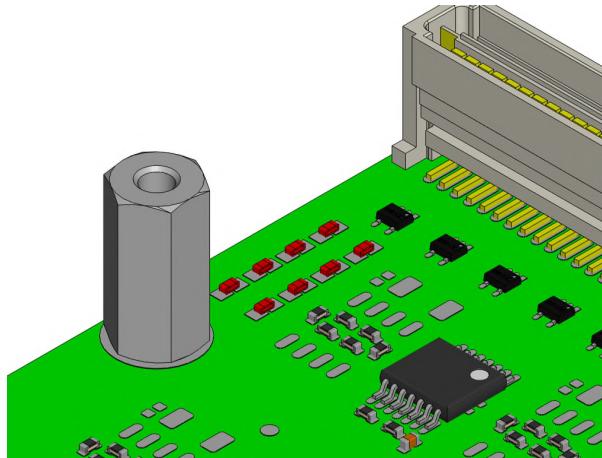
Default 0Ω bridges on PCB top side (marked in red)
